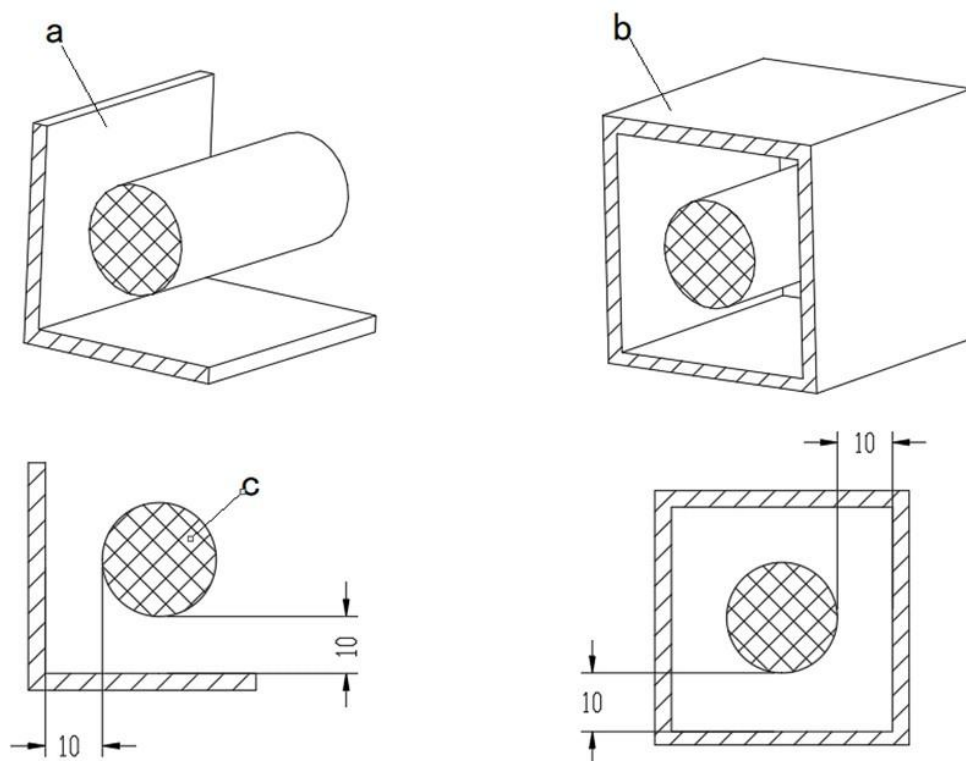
Safe minimum distance for receiver coil cable (measurement unit: mm)
